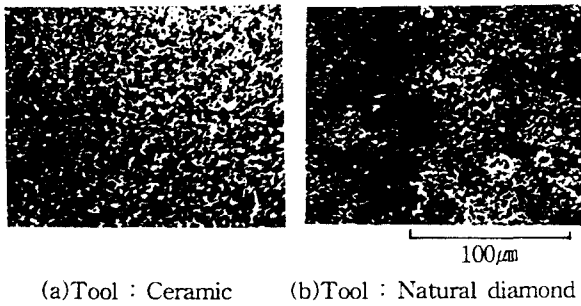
Comparison of the finished surface in machining the presintered ceramics with ceramic tool and diamond tool
